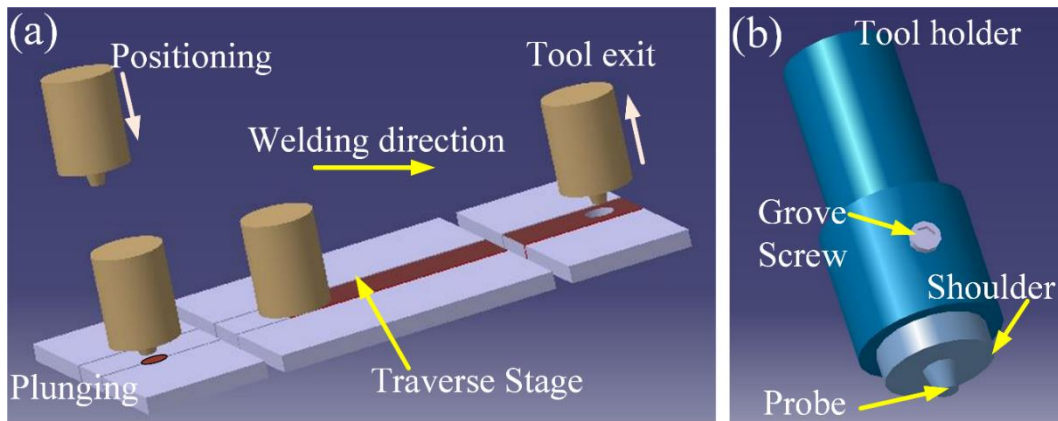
(a) Shows the schematic diagram of the FSW process, and (b) FSW tool mounted on the tool holder
